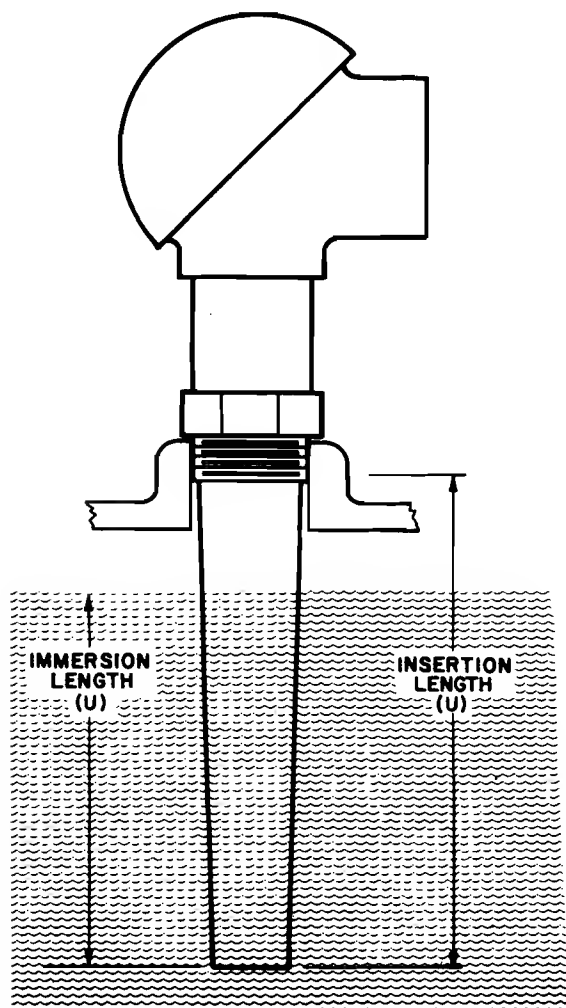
Immersion and Insertion Lengths for Thermocouple Assembly with Thermowell
